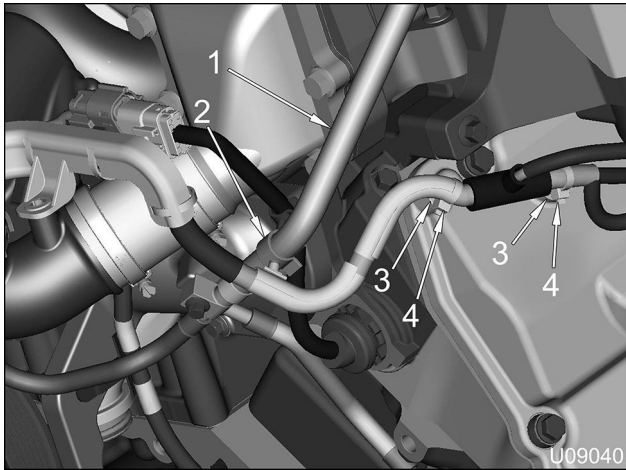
Fuel Rail Pressure (FRP) Sensor
